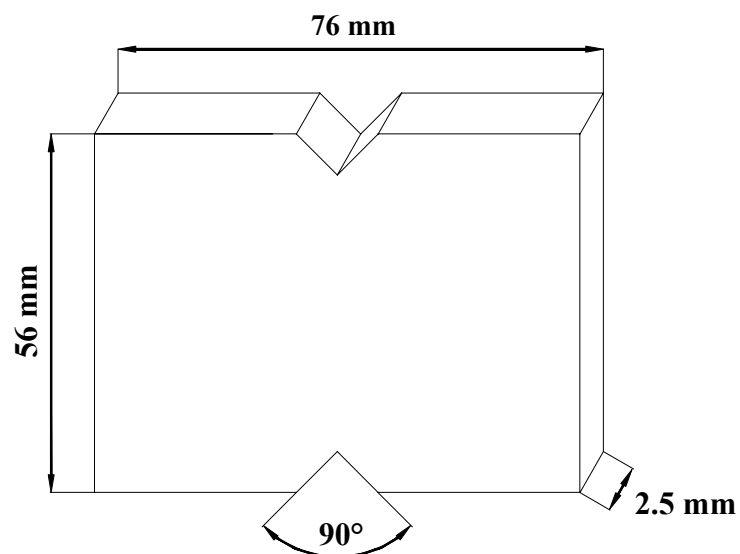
Dimensions of the V-notched rail shear test specimen
